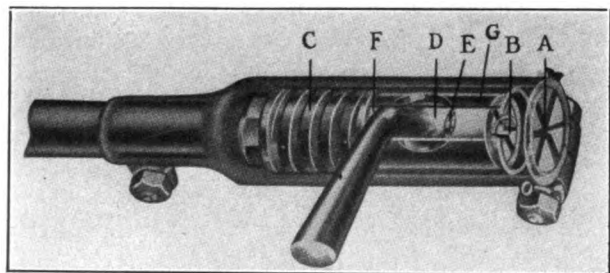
Components Utilized in Adjusting Fore and Aft Rod Connection of Knox Cars.
